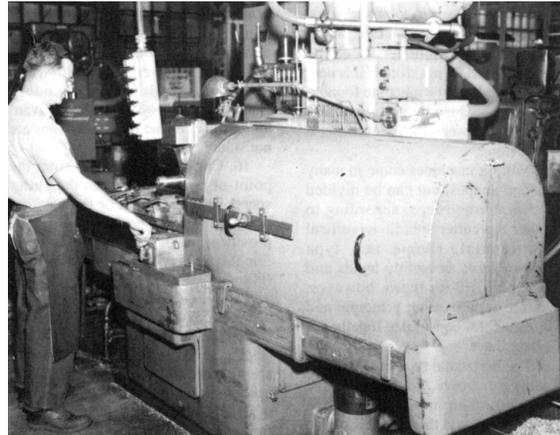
The spindle on this horizontal milling machine is completely guarded, protecting the operator from contact with moving parts and from flying chips. Note the accessibility of the controls.
